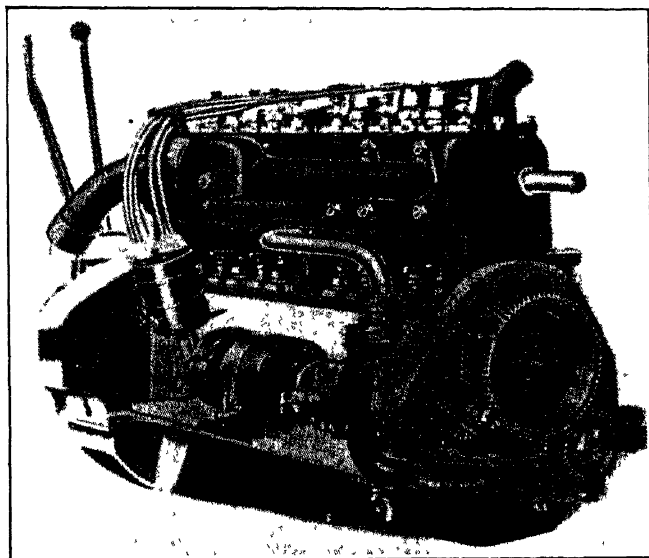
Generator driven by pinion from timing gear on Case Continental Six engine.
